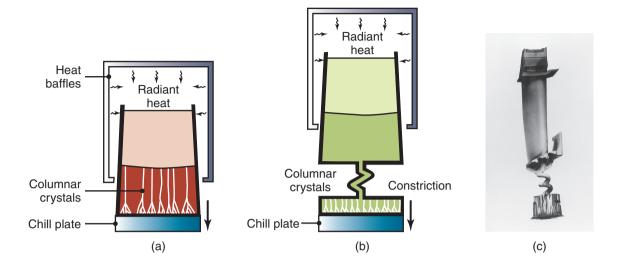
Methods of casting turbine blades: (a) directional solidification; (b) method to produce a single-crystal blade; (c) a single-crystal blade with the constriction portion still attached (see also Fig. 1.1). *Source:* (a) and (b) After B.H. Kear, (c) Courtesy of ASM International.
